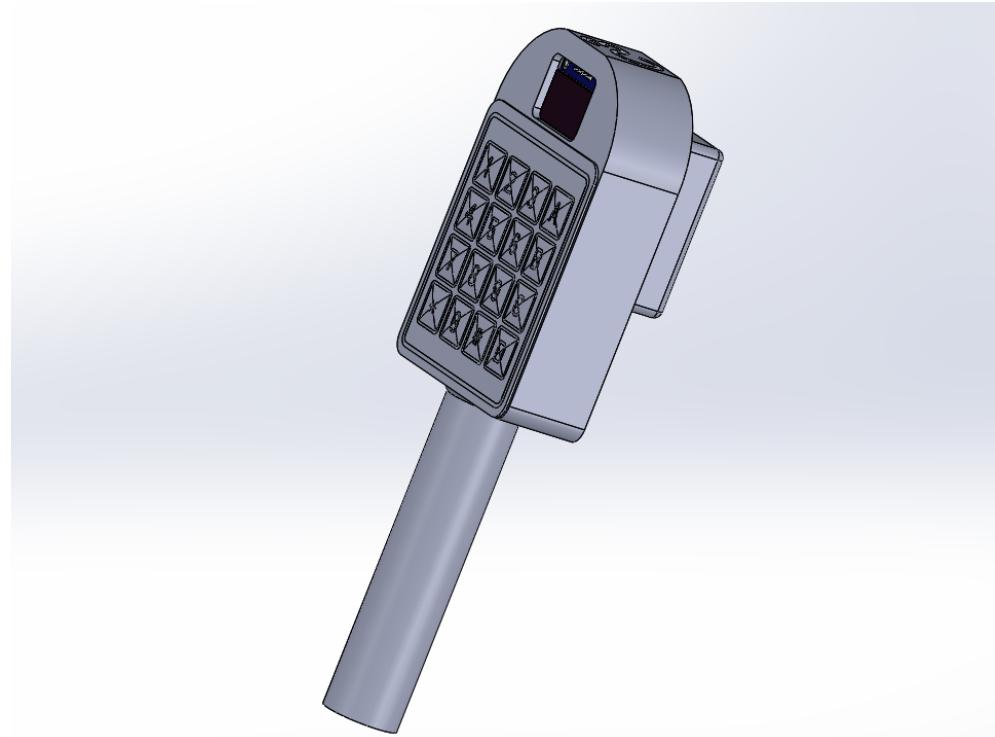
Solidworks Part Design for the Selection Nozzle Assembly (Nozzle Top, Handle, Nozzle Cover)
